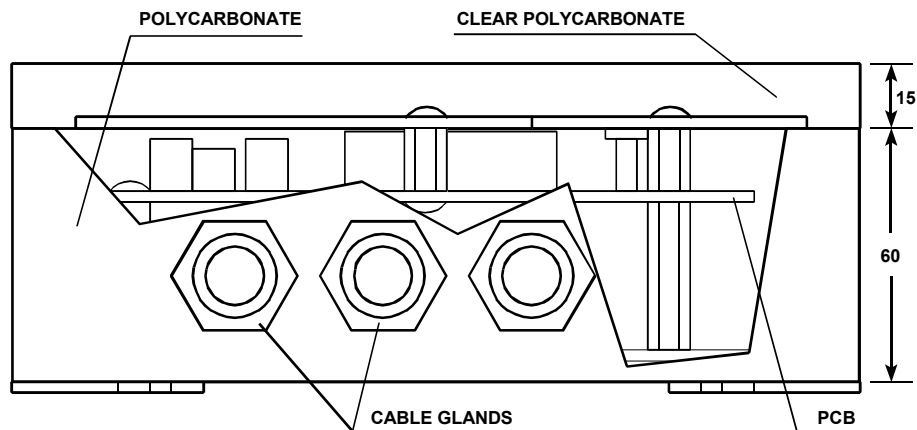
Enclosure bottom view showing gland positions and internal arrangement
